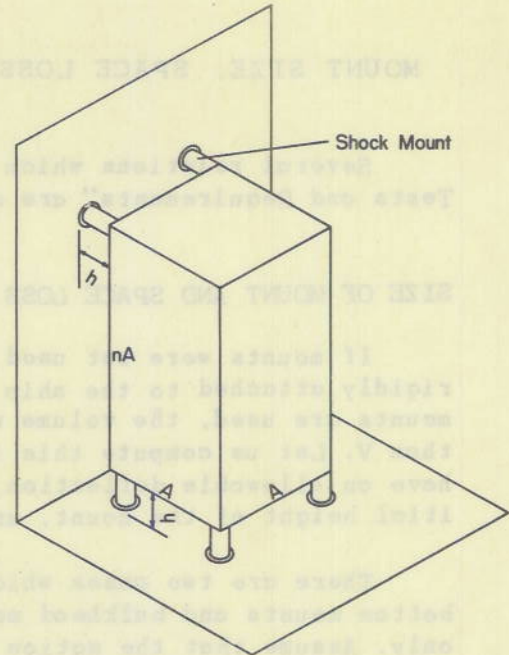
Equipment with bottom mounts and bulkhead mounts
